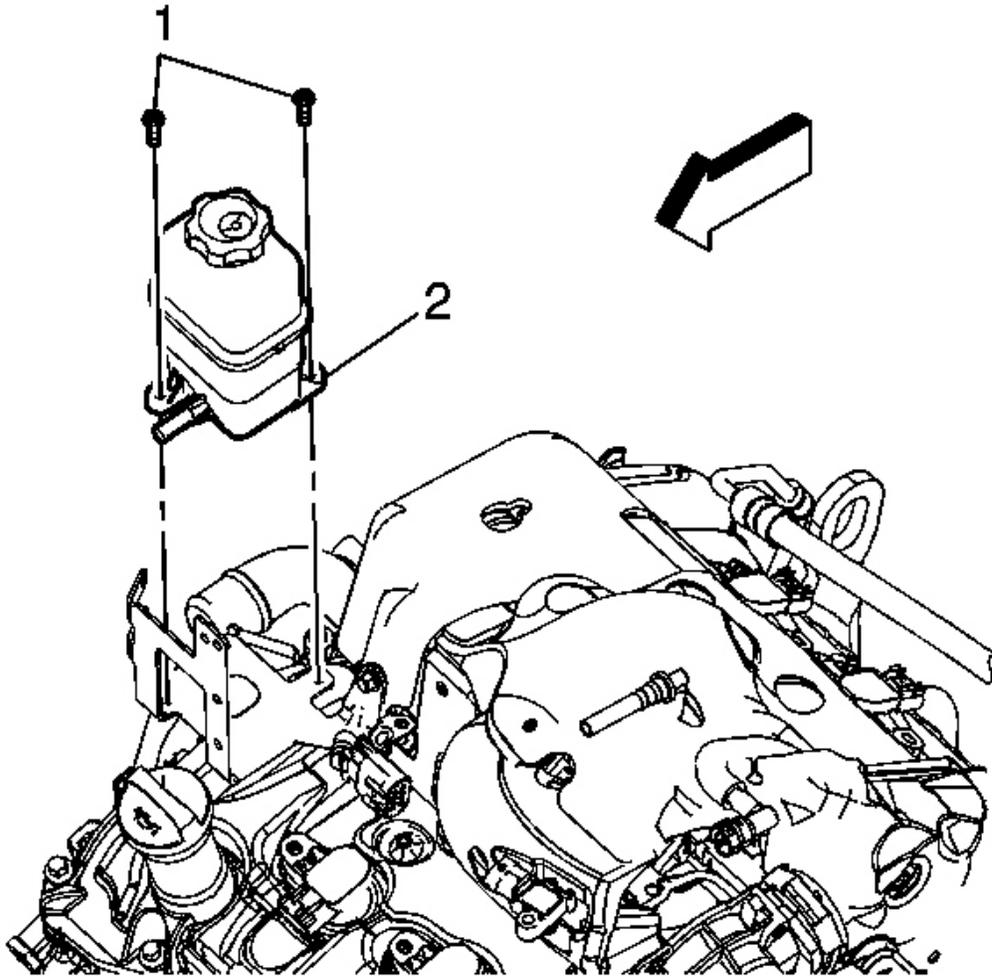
Locating Power Steering Fluid Reservoir & Bolts
